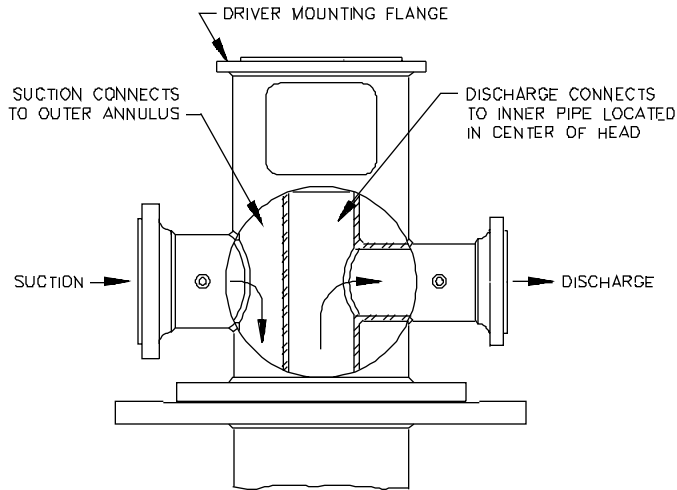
Suction & Discharge Identification - Type "VC" Discharge Head
